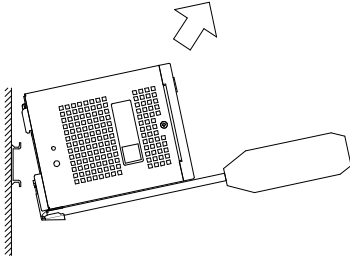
Removing the unit from the DIN rail with phillips-head screw driver < 3 / 3 >
